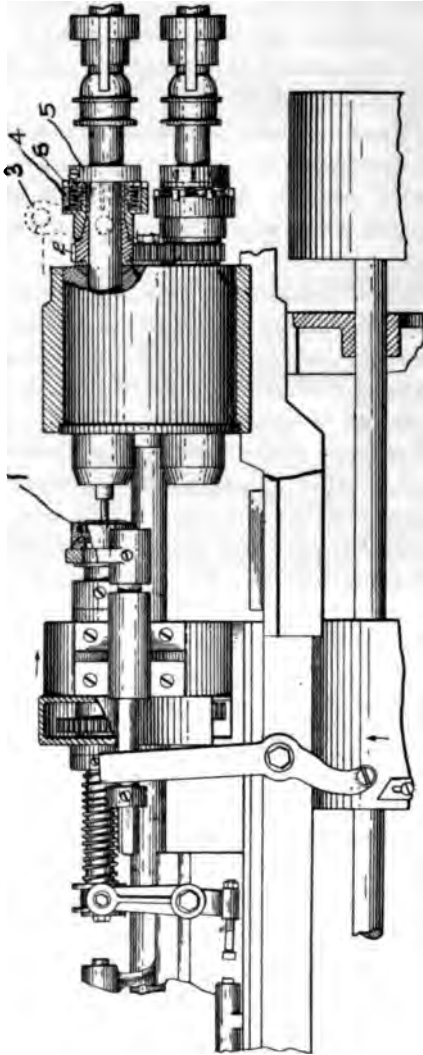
MULTIPLE SPINDLE SCREW MACHINE HAVING MEANS FOR AUTOMATICALLY STOPPING THE SPINDLE. NATIONAL ACME MFG. CO.
